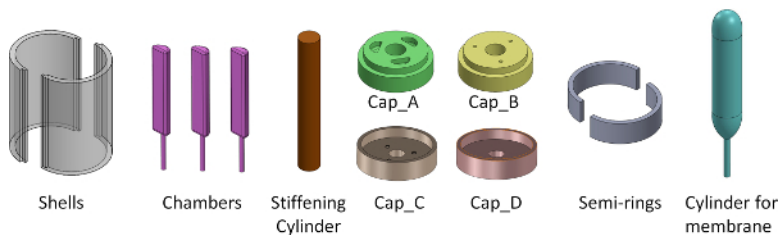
Mold components for the fabrication process. 13 pieces are overall used to assemble molds into which the silicone is poured and to fabricate custom latex membrane.
